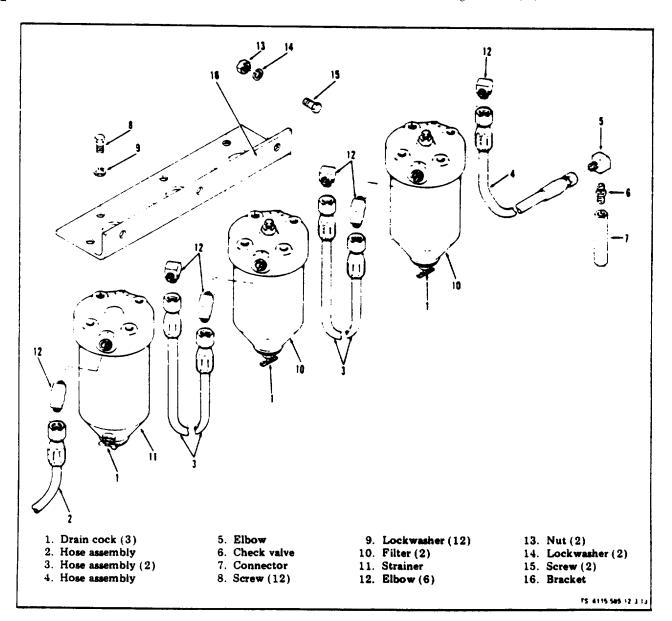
Fuel Filters and Fuel Strainer Assembly
